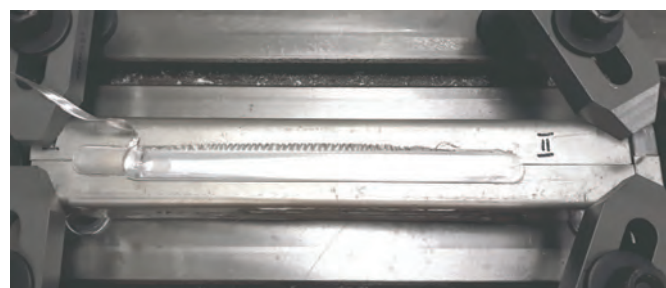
Mark II joint, with the initial FSW welding (covered), improved by the FSP II.2 pass, after the execution.
